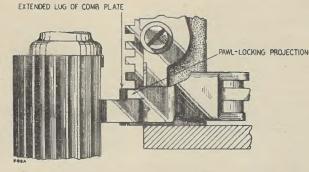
CHECKING ALIGNMENT OF ROTARS-PAWL LOCKING PROJECTION WITH COMB-PLATE LUG (CARRIAGE ASSEMELY IN 12TH ROTARS) POSITION WITH ARMATURE OPERATED)
